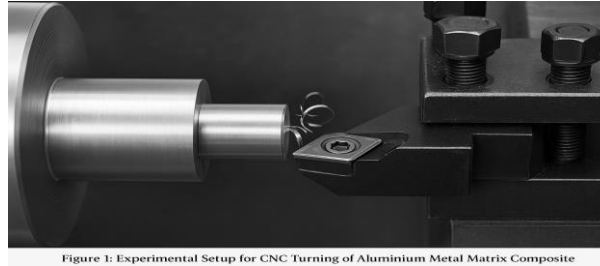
Experimental Setup for CNC Turning of Aluminium Metal Matrix Composite
